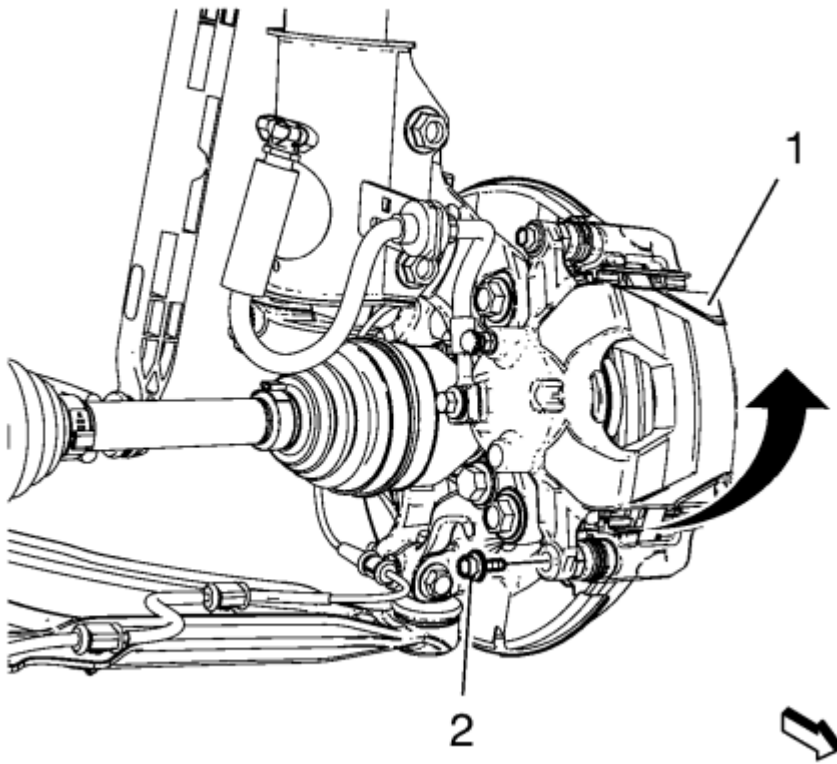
View Of Brake Caliper And Brake Caliper Guide Pin Bolt
